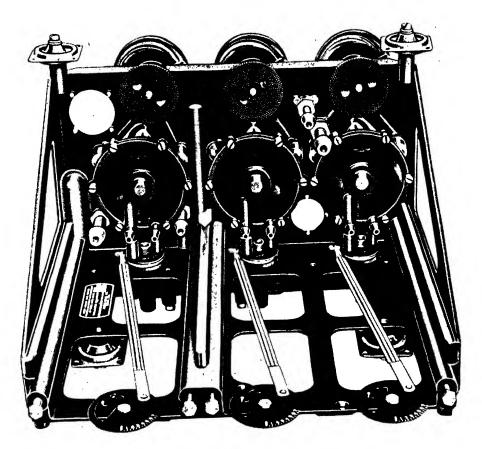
A gyro-control-mount assembly. (Courtesy Jack & Heintz, Inc.)
